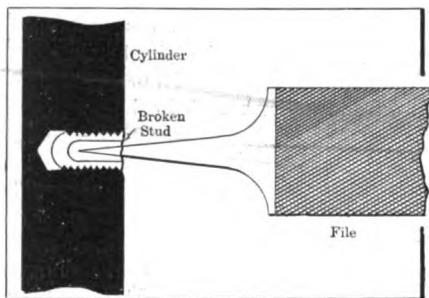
Method of extracting a broken stud holding the manifold to the cylinders by drilling a hole and using a file
